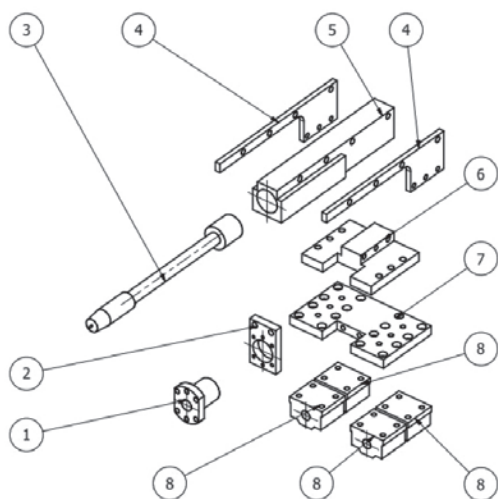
List of elements included in the welding torch of the AS-03 Welding Station.
